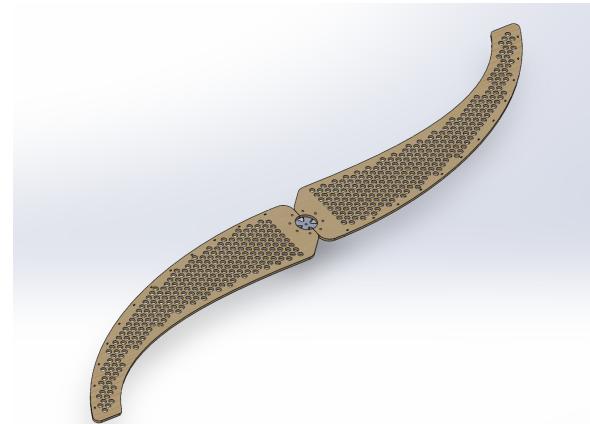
Scrapped prototype for holding two tubes on a motor shaft
